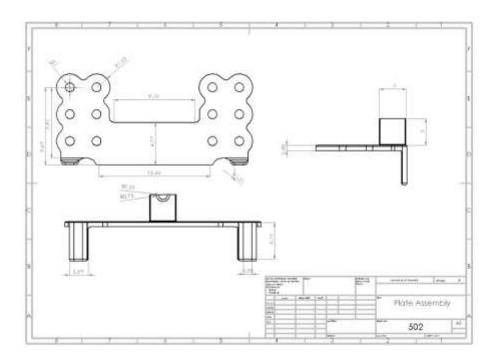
Annotated drawing of plates in final cranial distraction device
